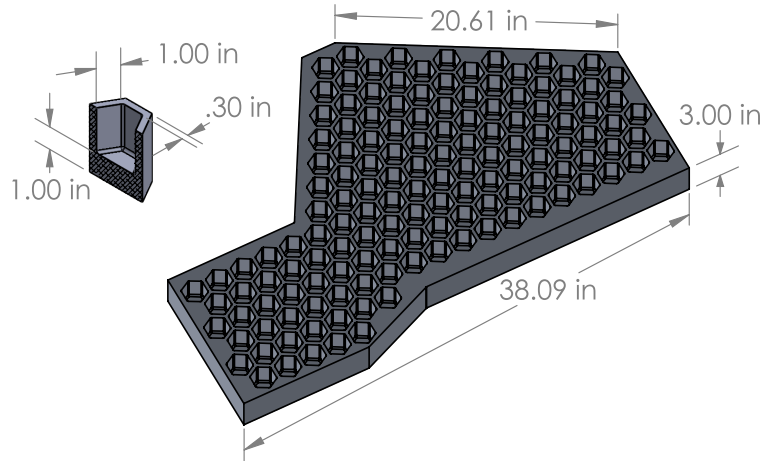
CAD rendering of the NEWS custom honeycomb optical bench (the bottom side as shown in Figure 6). An inset on the left shows a cross section of one of the honeycomb hexagons. The hexagons are 1 inch on a side (inner) with 0.3 inch thick walls and are milled 2 inches deep, leaving 1 inch of solid aluminum for the mounting surface.
